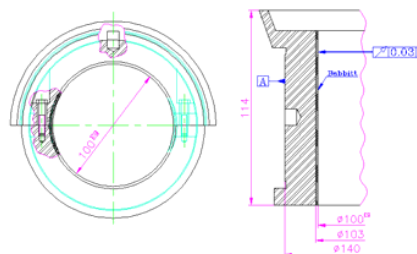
boiler feed pump bearing in electromotor (tin based babbitt)
